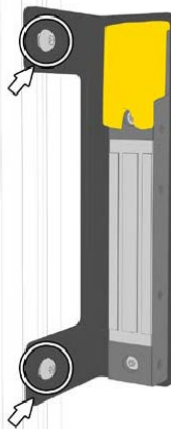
Attach the mounting plate with the process guard locking to the profile and tighten the Torx screws M8 x 12 mm.
